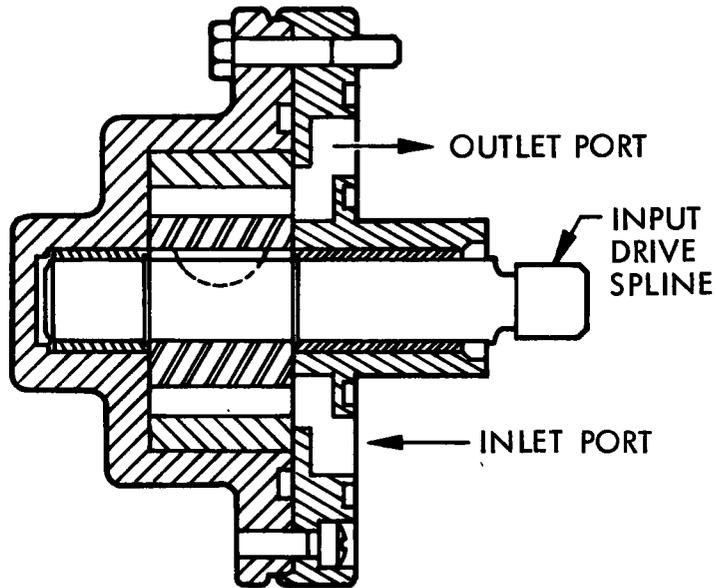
Gerotor Type Mechanical Pump – Cross Section
